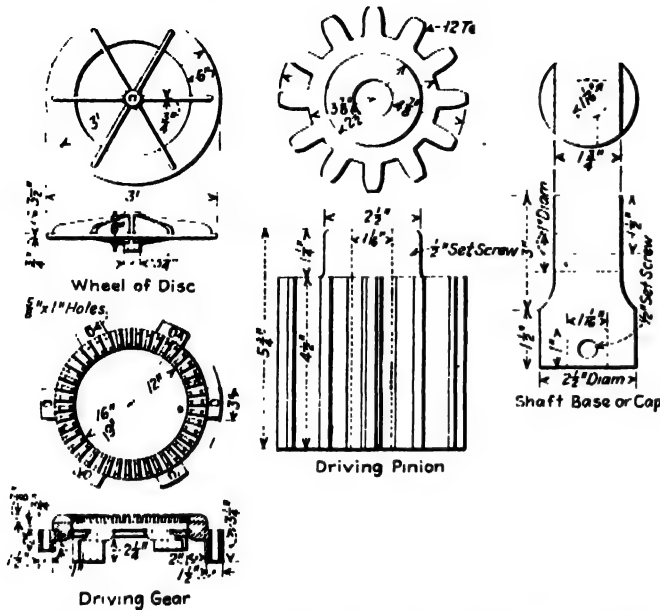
DETAILS OF DISK AND DRIVING MECHANISM
